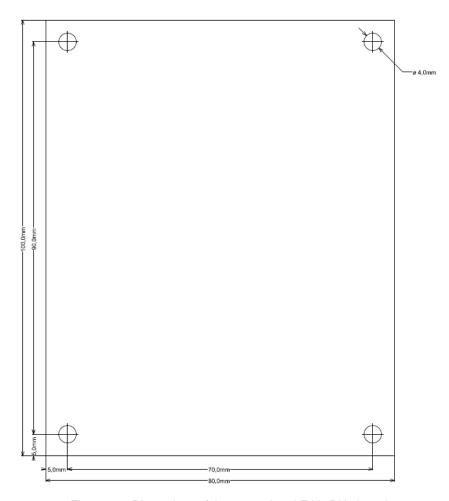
Dimensions of the swarm bee LE V3 DK+ board
